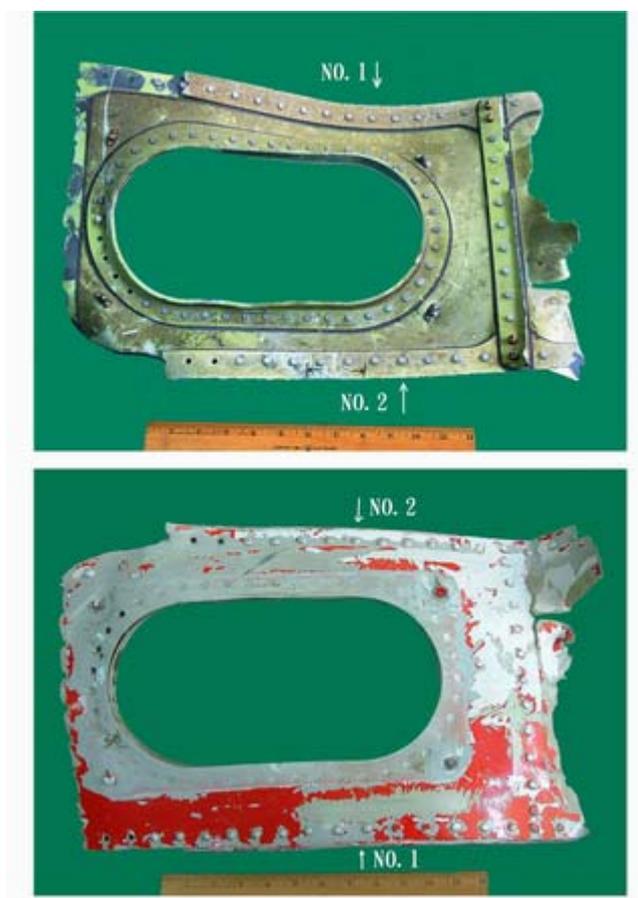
Wreckage with suspected fatigue crack
